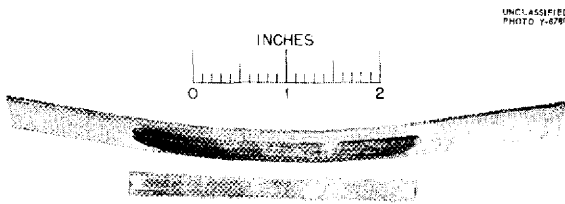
Carboloy Rod Microbrazed to Type 316 Stainless Steel.
